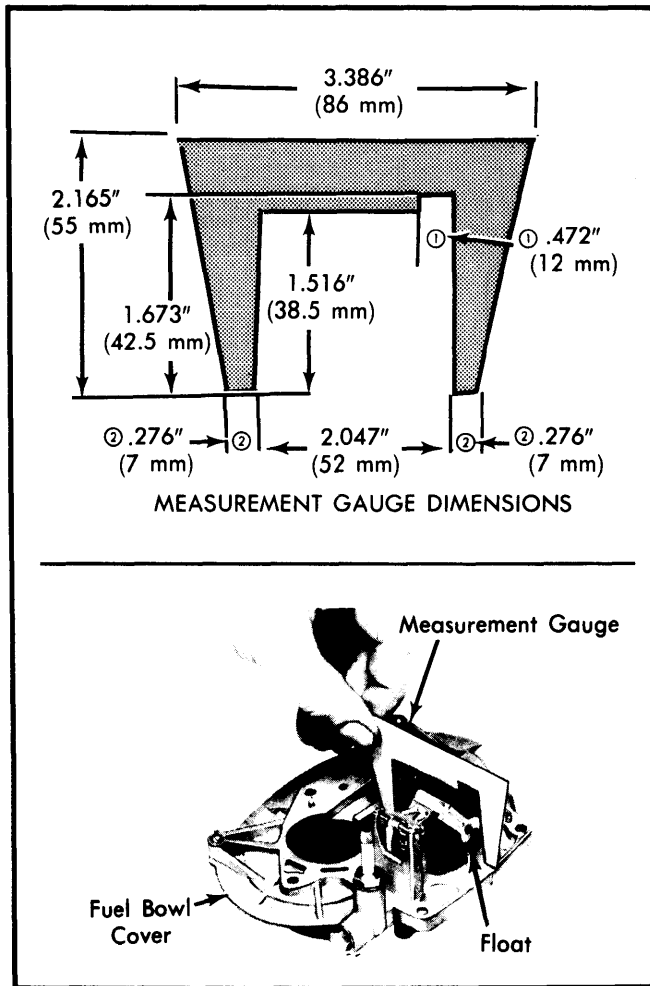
Float Level Adjustment Showing Fabricated Measurement Gauge
